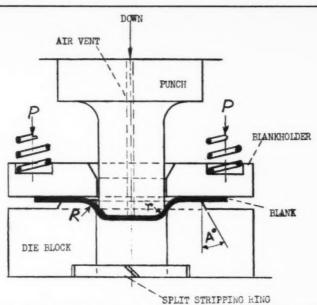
The spring steel split ring strips drawn shell from punch on its upstroke. Stepped angle A°, on the face of the die block, serves to increase friction on the "slip" of the blank while being drawn down into the dic. The holding power of the blankholder is thus increased greatly without adding more compression springs P-P.
